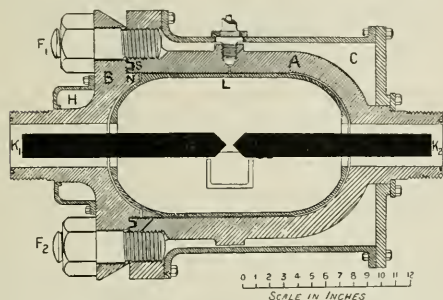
SECTIONAL DRAWING OF HIGH-PRESSURE FURNACE.
